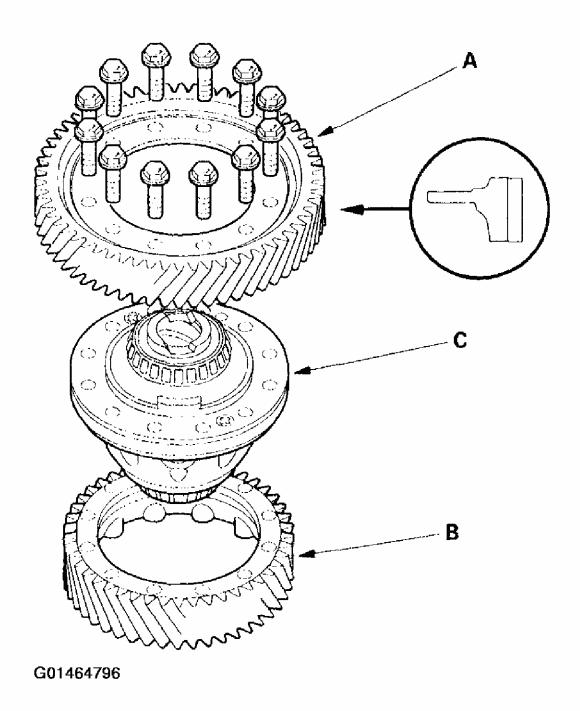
Removing The Final Driven Gear & Transfer Drive Gear From The Differential Carrier
